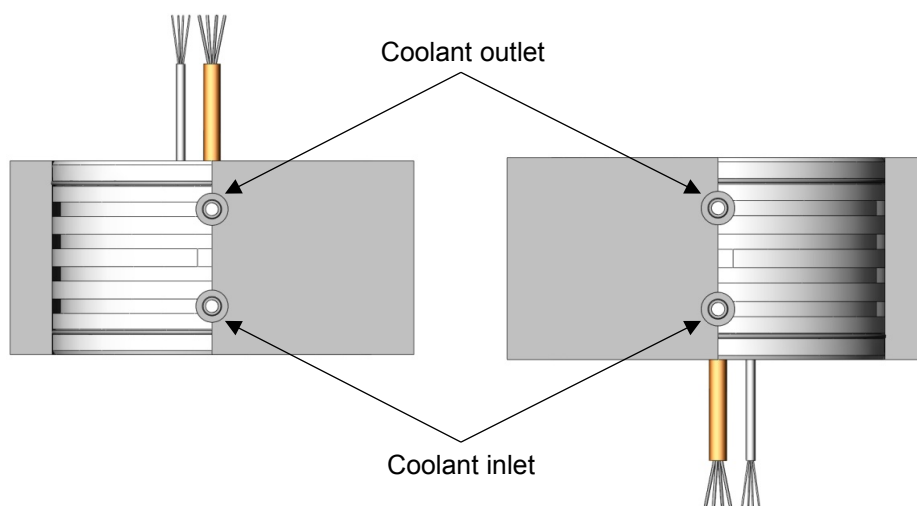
Coolant inlet / outlet position when mounted horizontally
